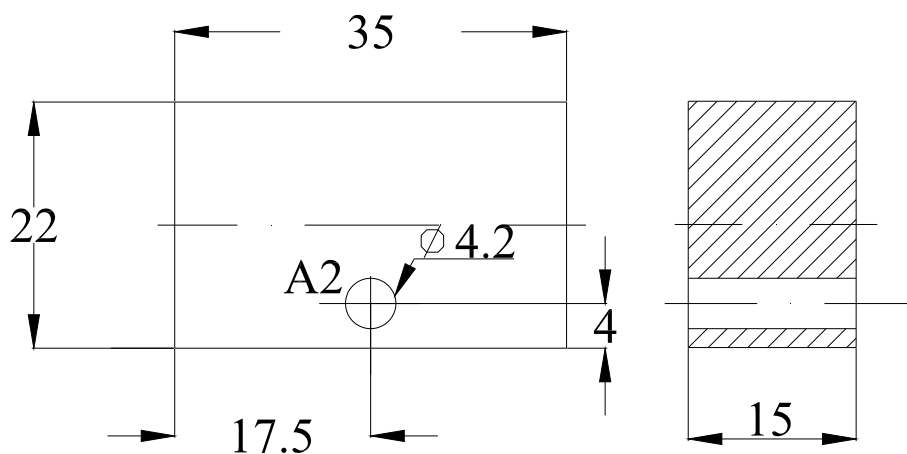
drilling the first hole of  $\varnothing 4.2$  (mm)
